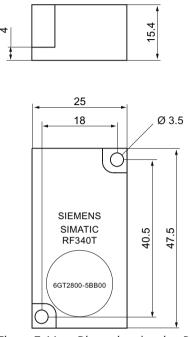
Dimension drawing RF340T Dimensions in mm
